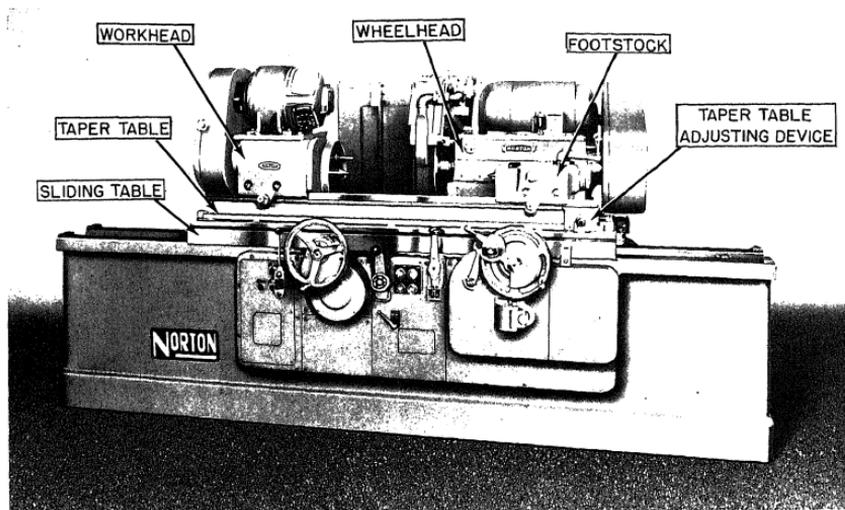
Cylindrical grinder (with workhead and footstock mounted).
